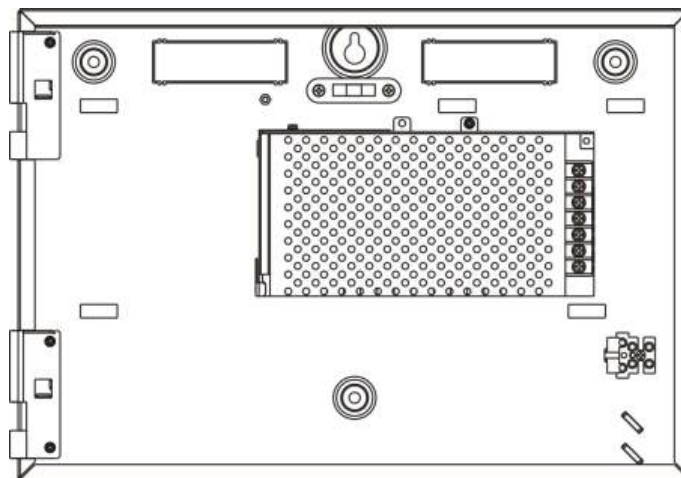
Large cabinet and PCB layout (with 10 A power supply)
